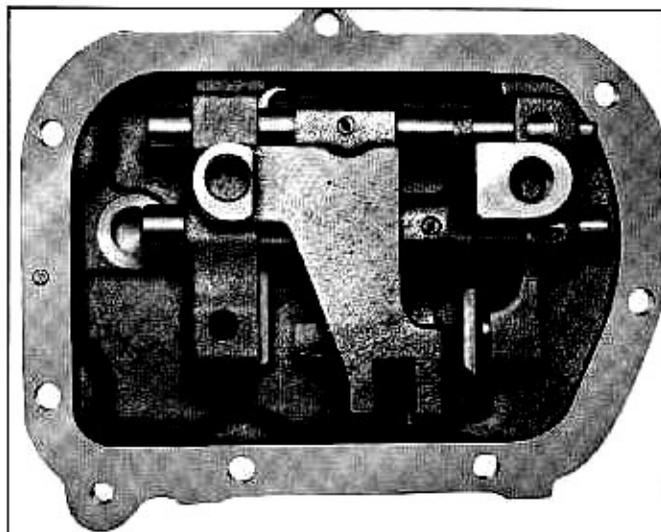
A—1st & Reverse Shifter Head & Shaft Installed to Cover
